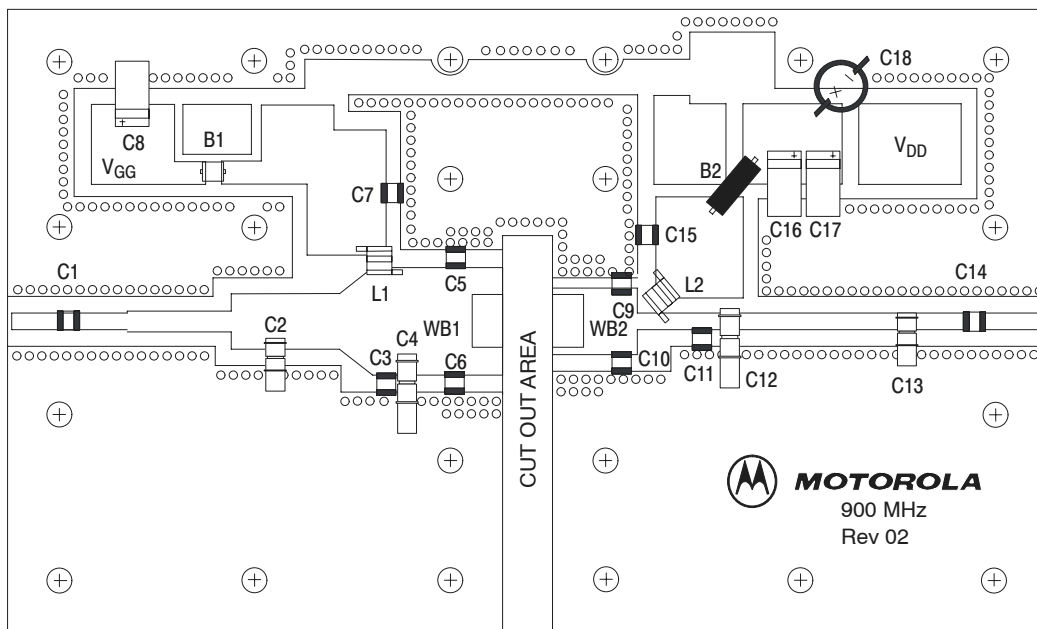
930-960 MHz Broadband Test Circuit Component Layout (MRF9030MR1)
